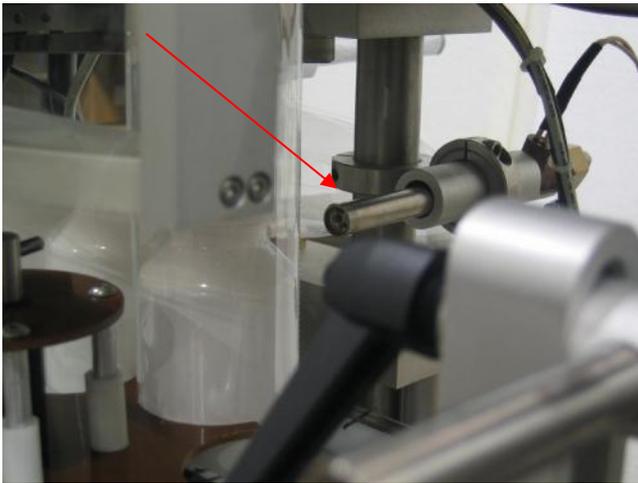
Band Tacker (Option) - If you are using just neck bands and have caps the same size or larger than the container you need to enable the Band Tacker and adjust it to just tack the band on to the neck.
